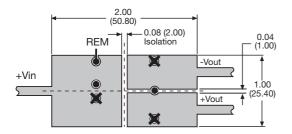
Optimum PCB layout for Single Output CXA10's on a single-sided PCB
